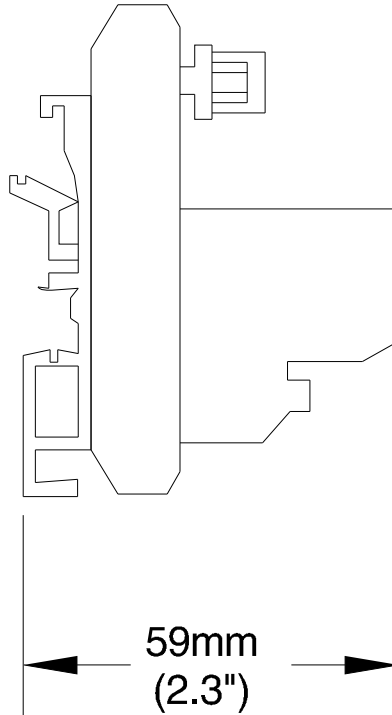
MOUNTING DIMENSIONS FOR 1771-RT REMOTE TERMINATION PANELS
